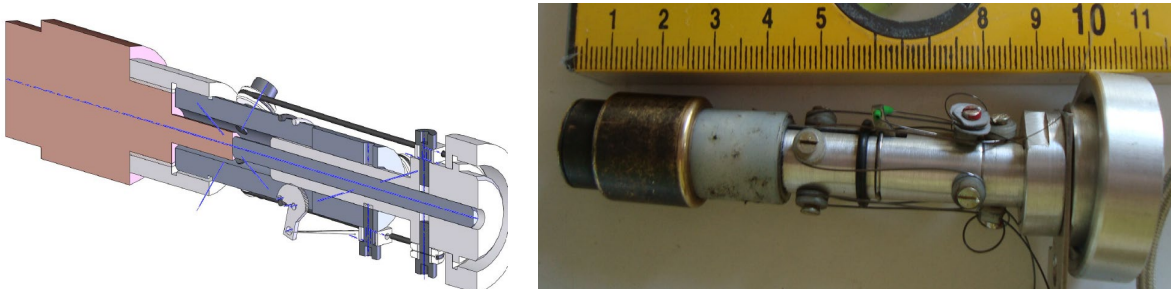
Control head with rotary design: a) Solidworks drawing of a control thermostat head; b) prototype of the rotary head.
